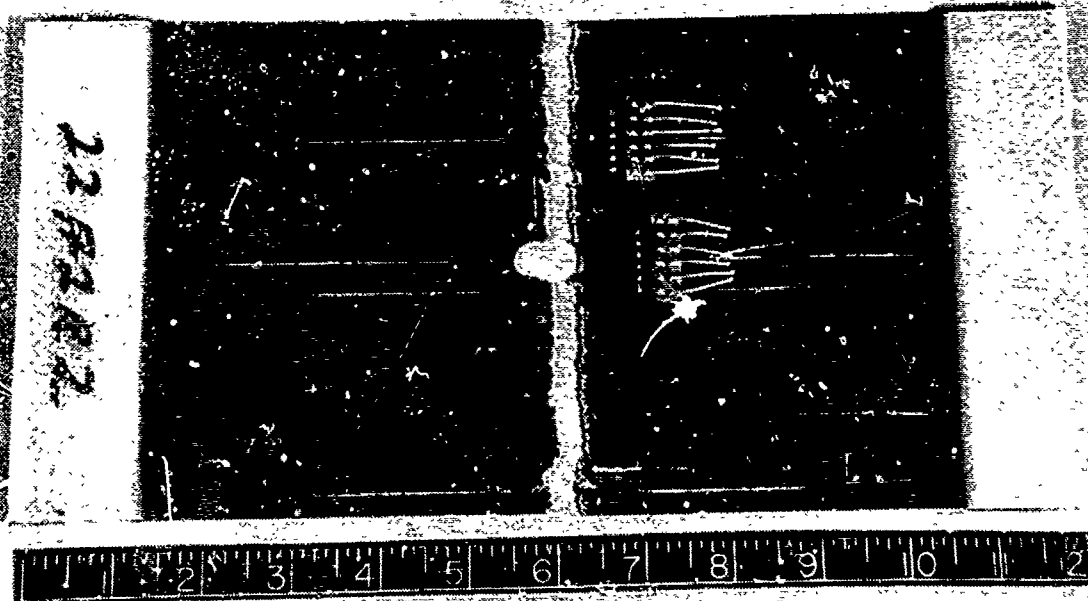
Failure Under Uniaxial Tension Load, Specimen 22A2R2
